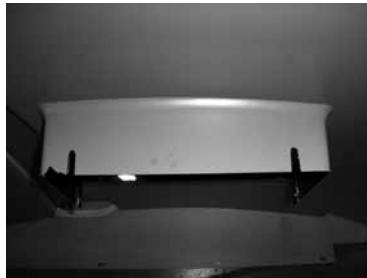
The sign slots shown here should slide around the port carriage bolts.
